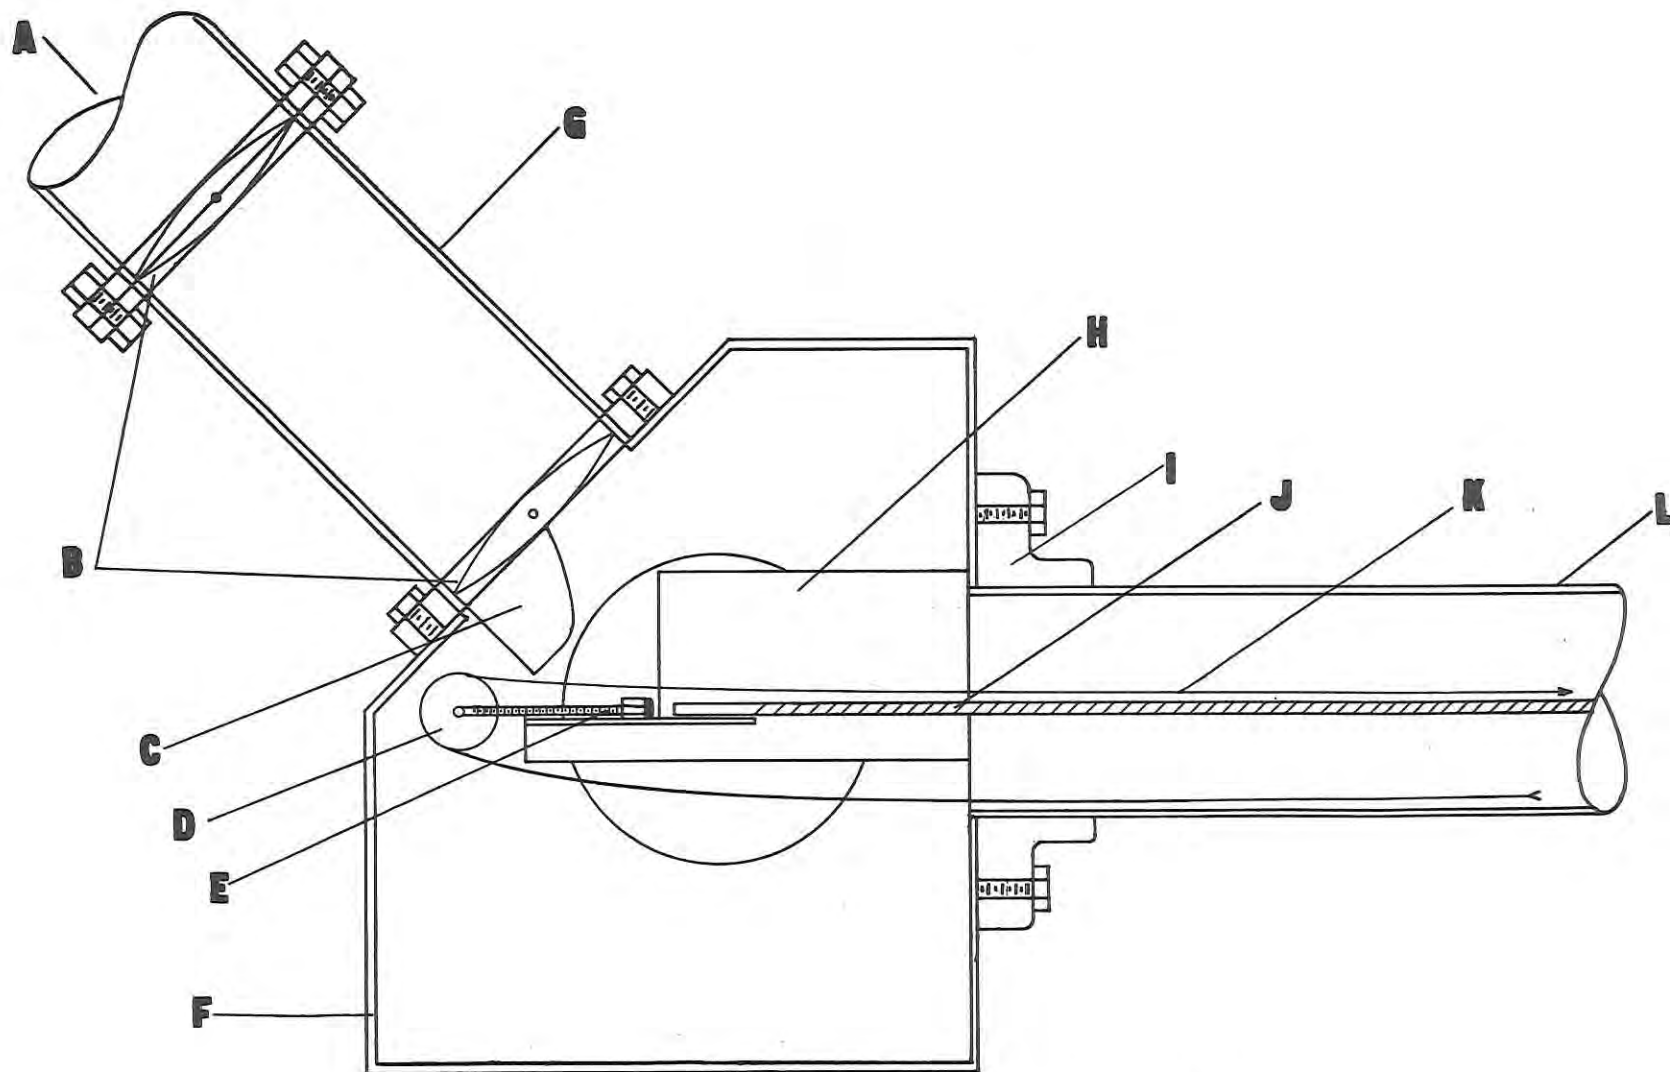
Cross-sectional sketch of valve assembly at feed end of system.
